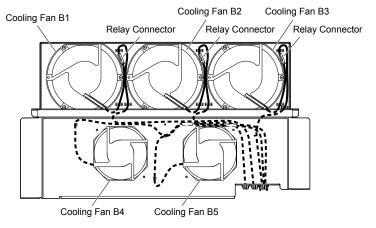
Cooling Fan Wiring: 4A0515 and 4A0675
